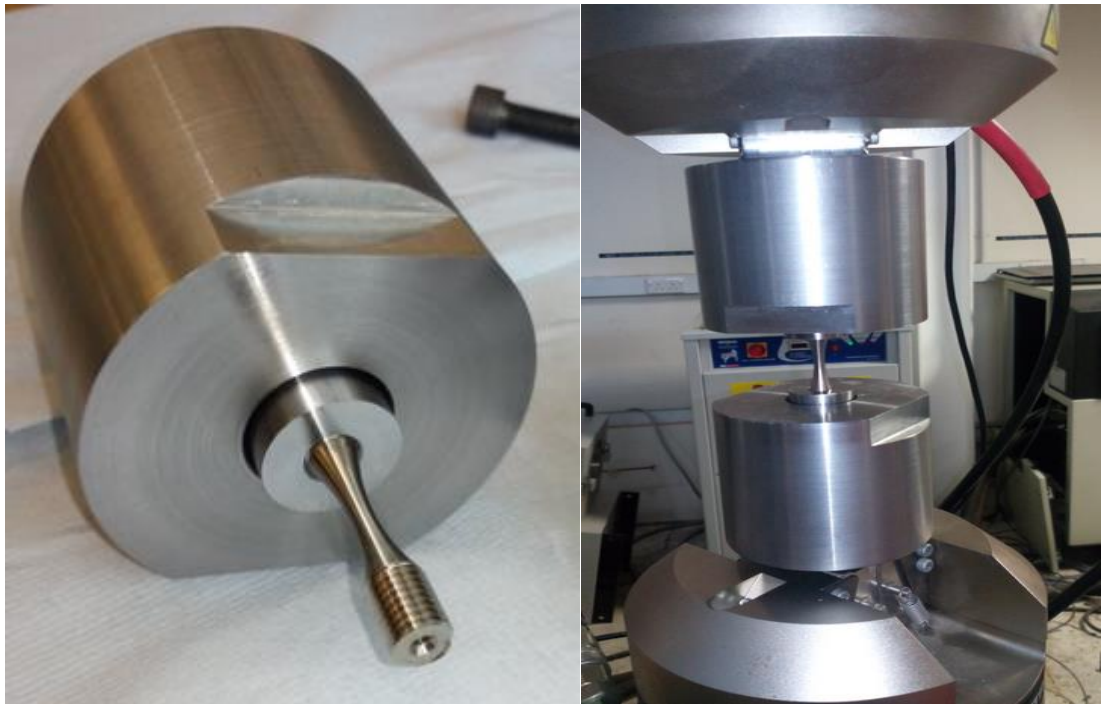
Left, Fatigue Assembly with Fatigue Test Piece, Right, Fatigue Assembly set up on Instron 8801.
